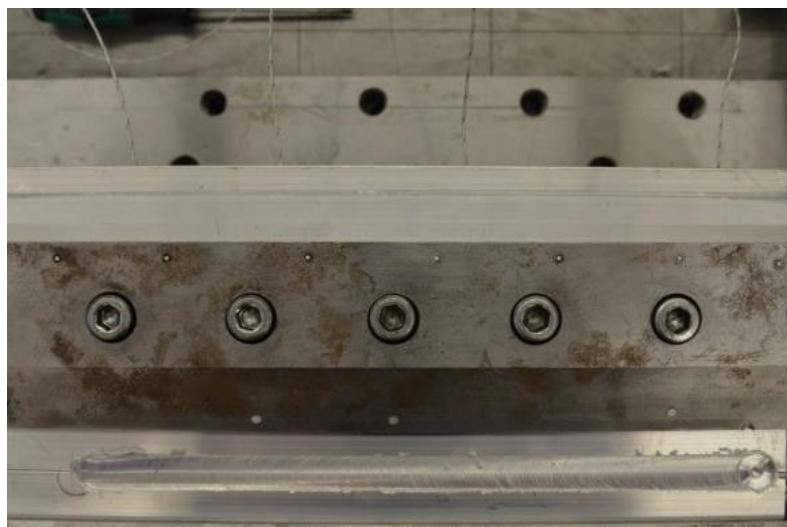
Positioning of the thermocouples along the weld seam (from left TE1 - TE4)
